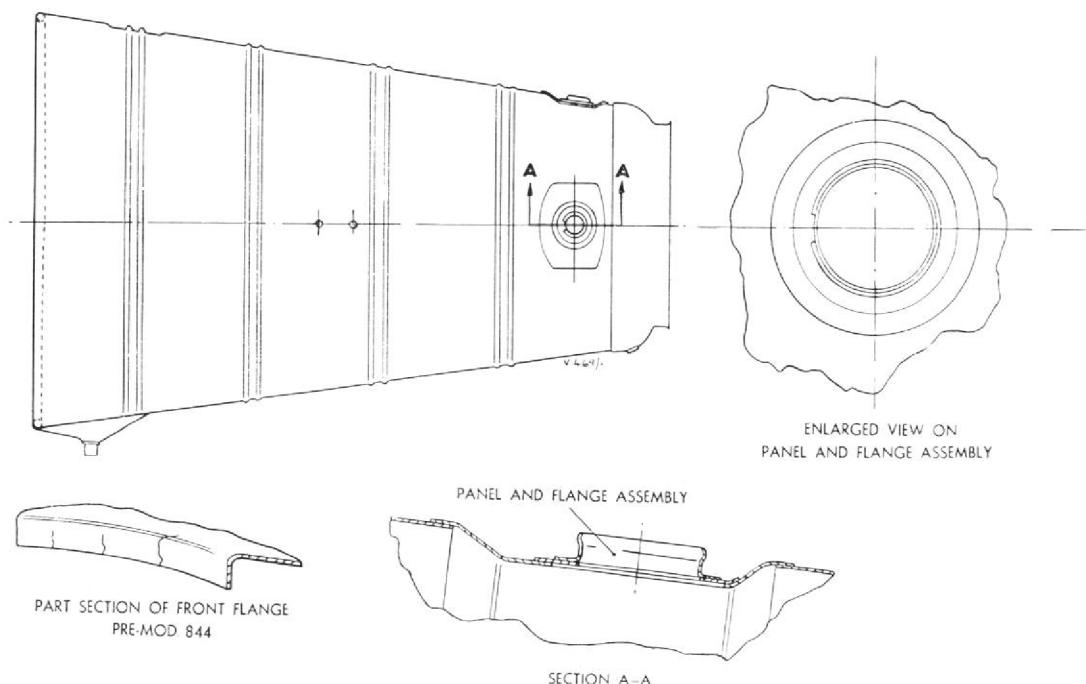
View of the fireguard showing thermocouple flanges and location of cracks in front flange.
